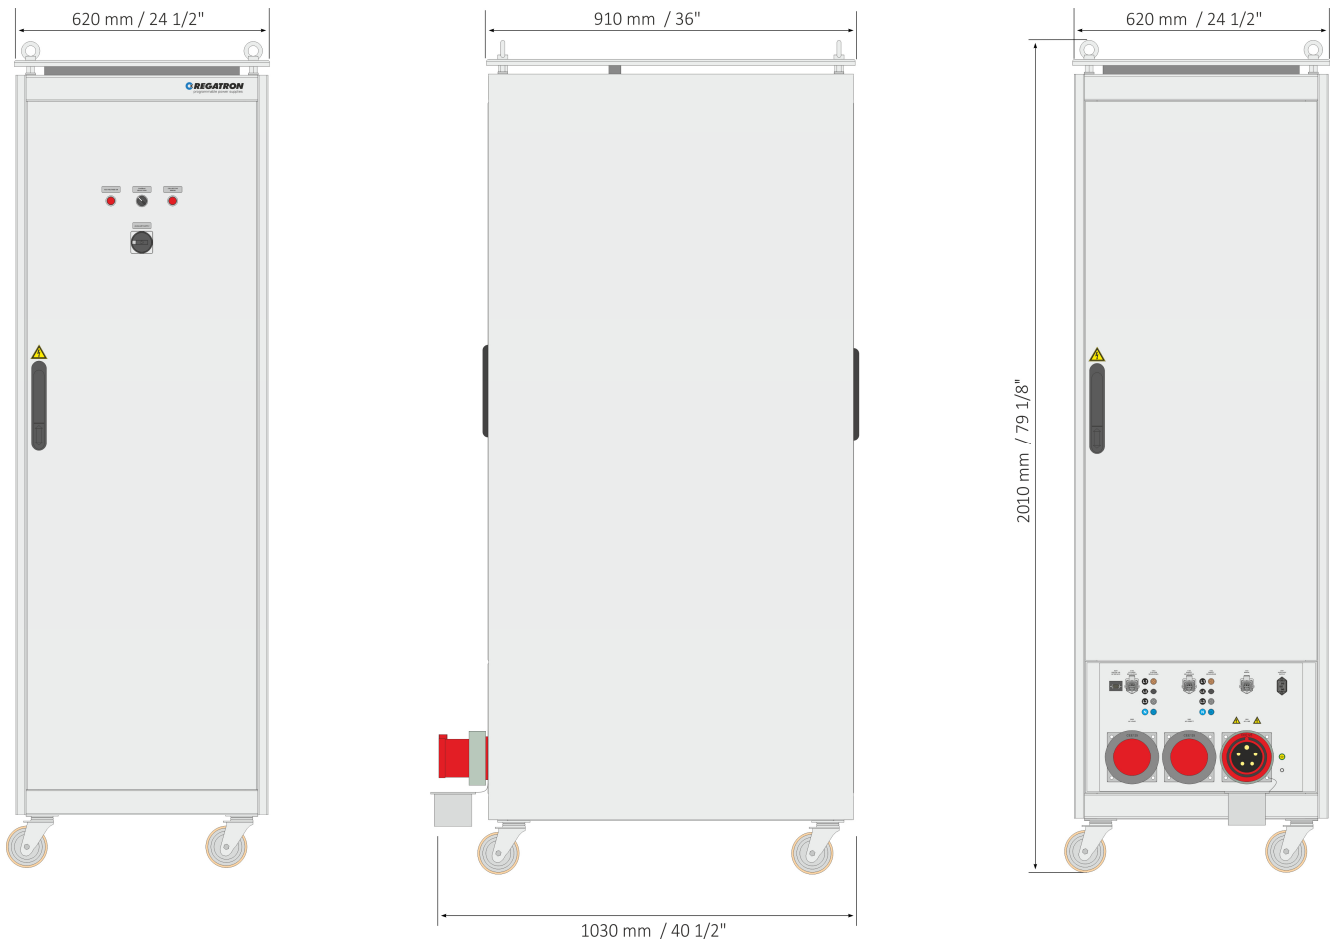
Front, side and rear view of the 19" rack with dimensions.
